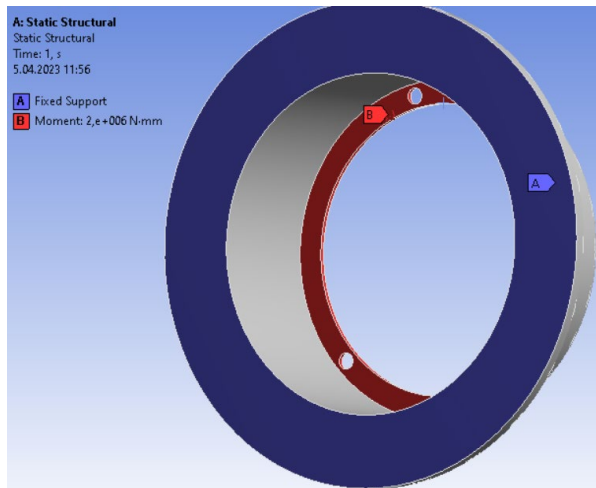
Physical Conditions 2000 N.m braking torque and braking flange is fixed
